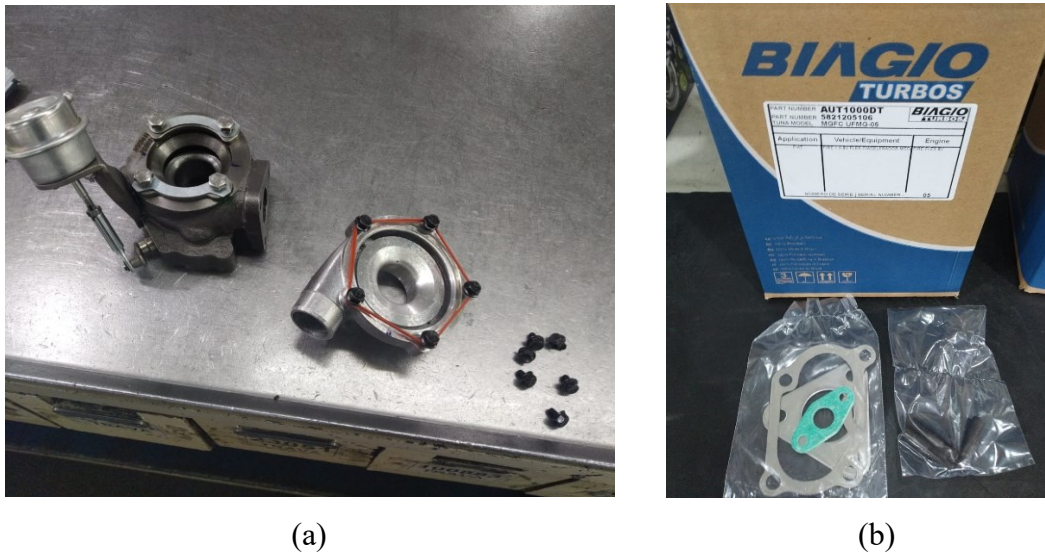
(a) New turbine and compressor housing and (b) miscellaneous parts and final packaging
